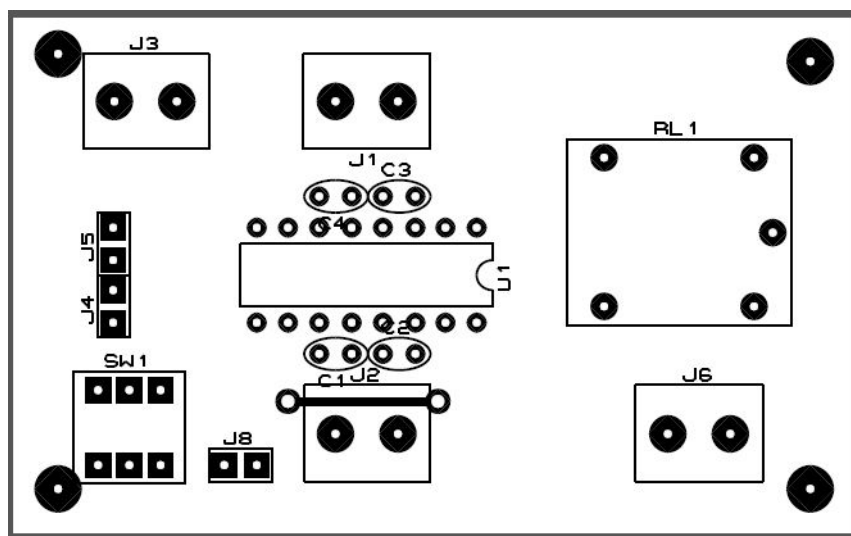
PCB Diagram of Motor Driver and Relay (Top Layer)
